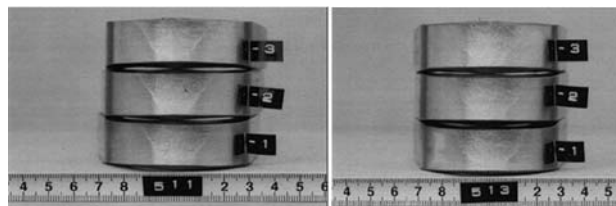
Macrostructure of DW-329AP one-sided weld joints in flat welding (left) and vertical-up welding (right) with ceramic backing and 80%Ar-20%CO₂ shielding
